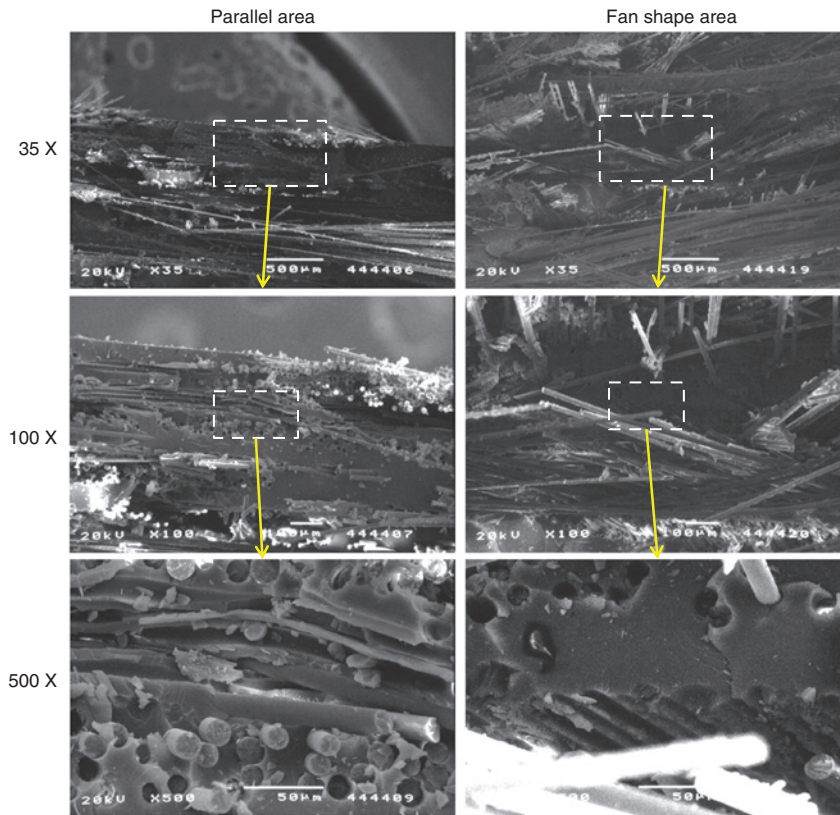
Fracture of notched specimen in parallel area (fiber fractures) and fan shape area (pulling out or shearing fracture of glass fibers).
